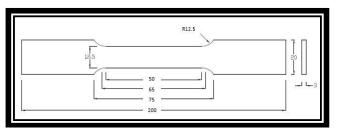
Standard Tensile Test Sample, dimensions in mm for the selected specimen [ASTM E8M]
